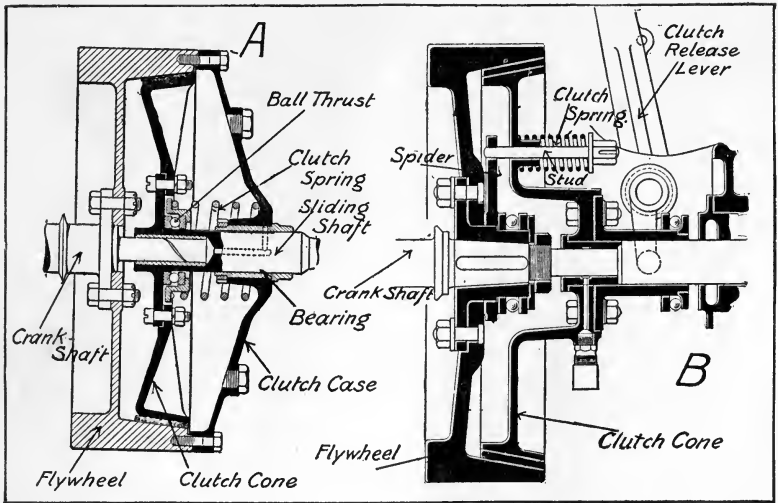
Cone Clutches of English Design. A—Metal-to-Metal Surfaces in Oil-Tight Case. B—Method of Holding Parts in Contact with Adjustable Springs.
